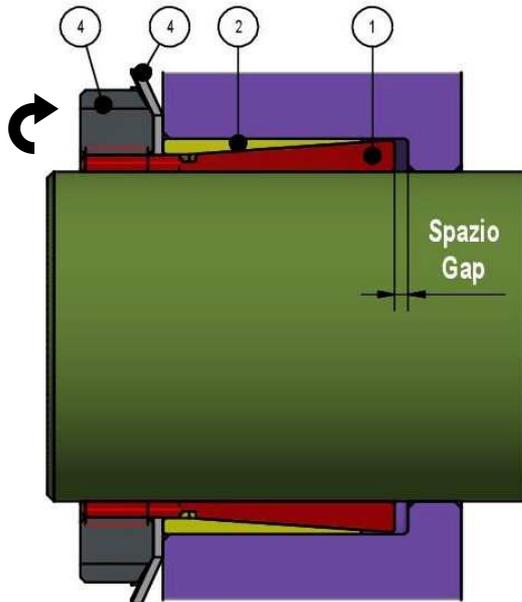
Positioning of Locking Assembly and tightening of the nut.
